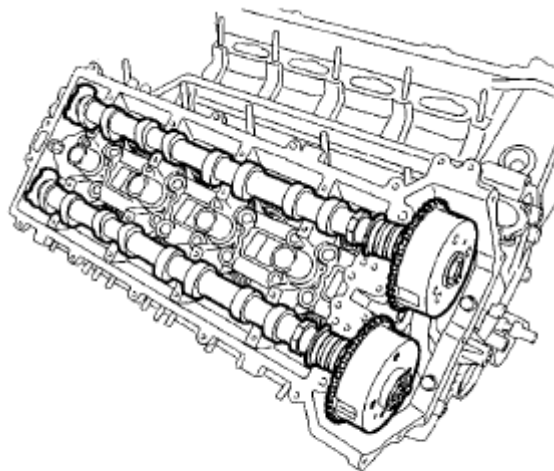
Identifying Hydraulic Lash Adjuster Assembly
